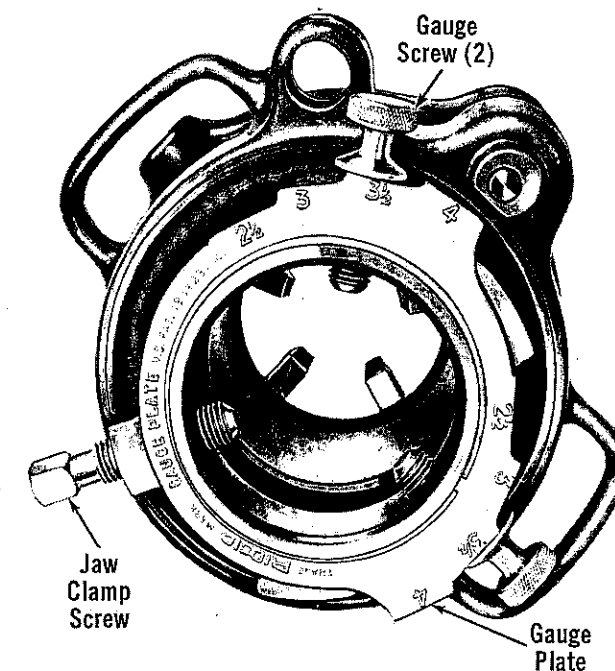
No. 4PJ Geared Threader with Workholder Up.
